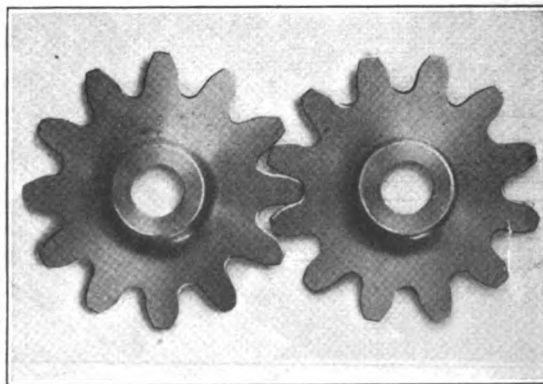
PAIR OF PINIONS CUT ON A MILLING MACHINE
